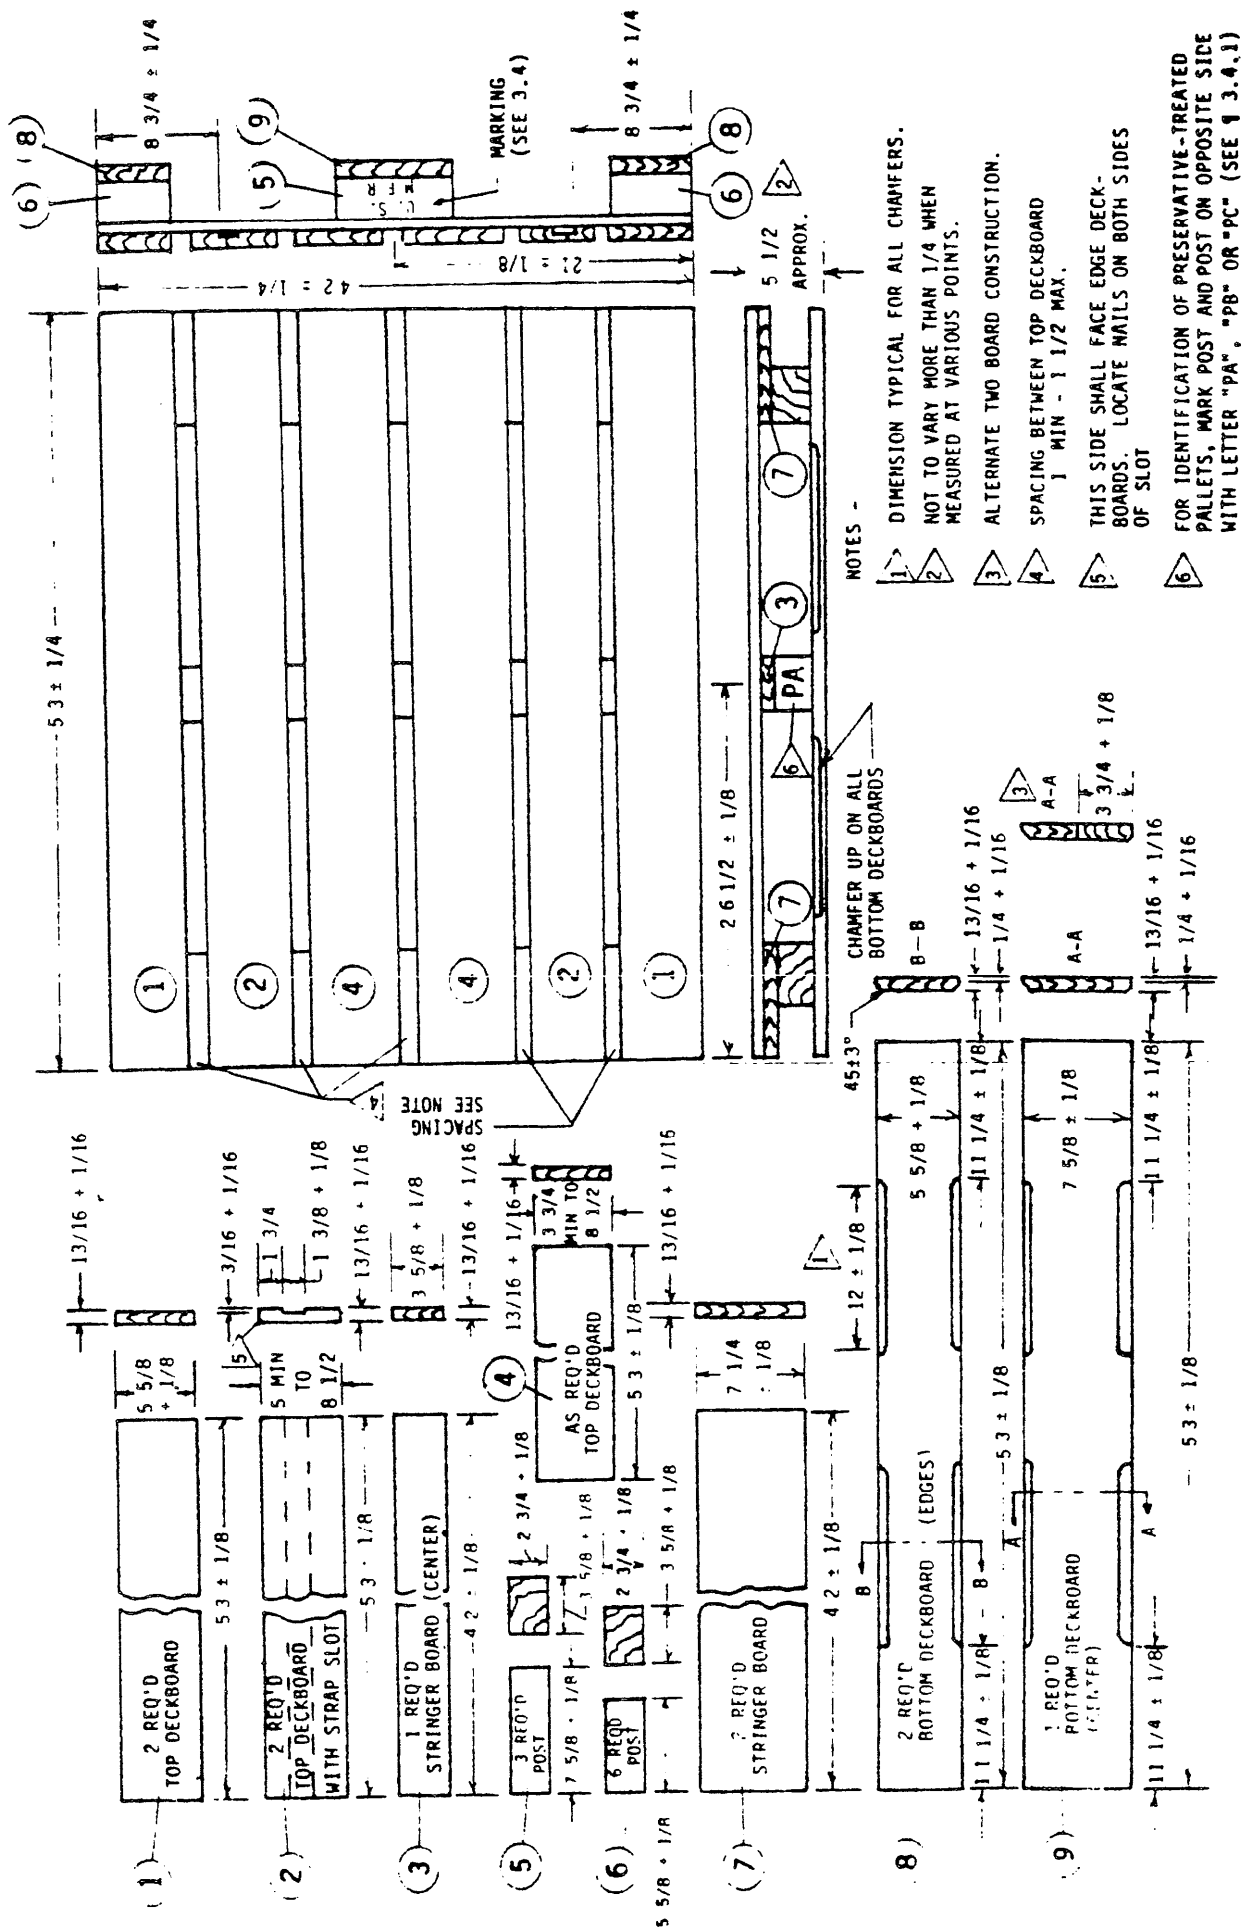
A PALLET ASSEMBLY STYLE 1 A
